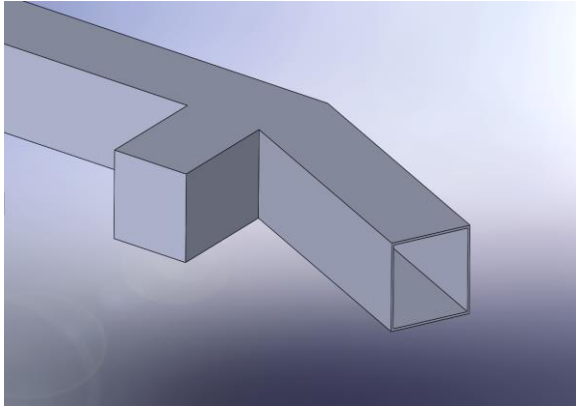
(d) Side view of the Rectangle Sectioned Bumper Beam
